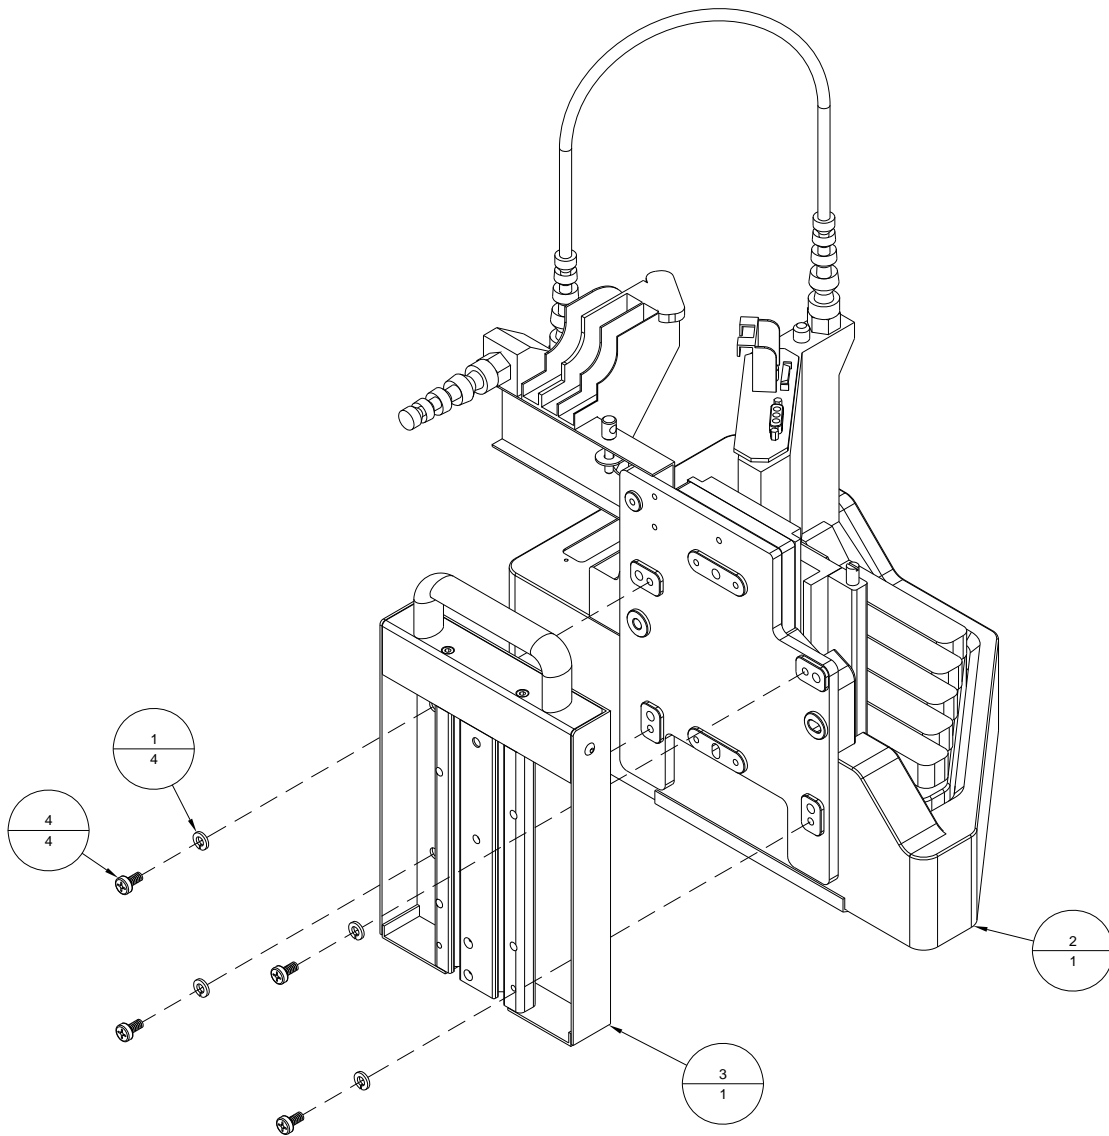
9104402A - Hyperion Head & Mount Assembly
